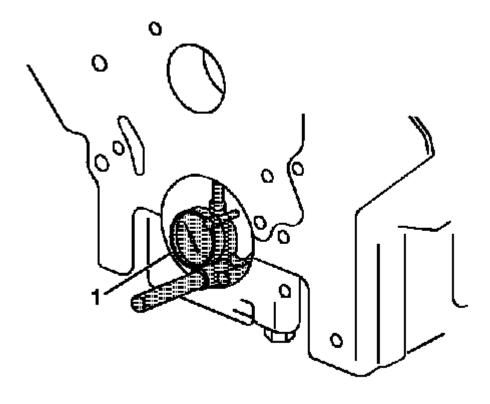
Inspecting Mating Surfaces Of Transmission Face Courtesy of GENERAL MOTORS COMPANY
